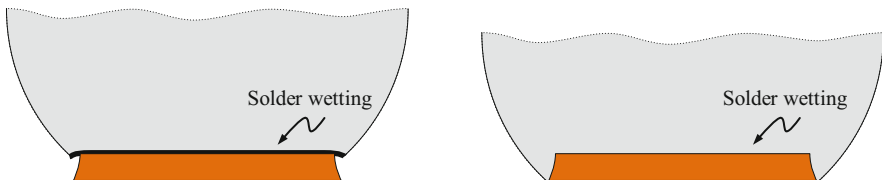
Wetting of solder joints on ENIG finish (*left*) and OSP/immersion Ag finish (*right*)
